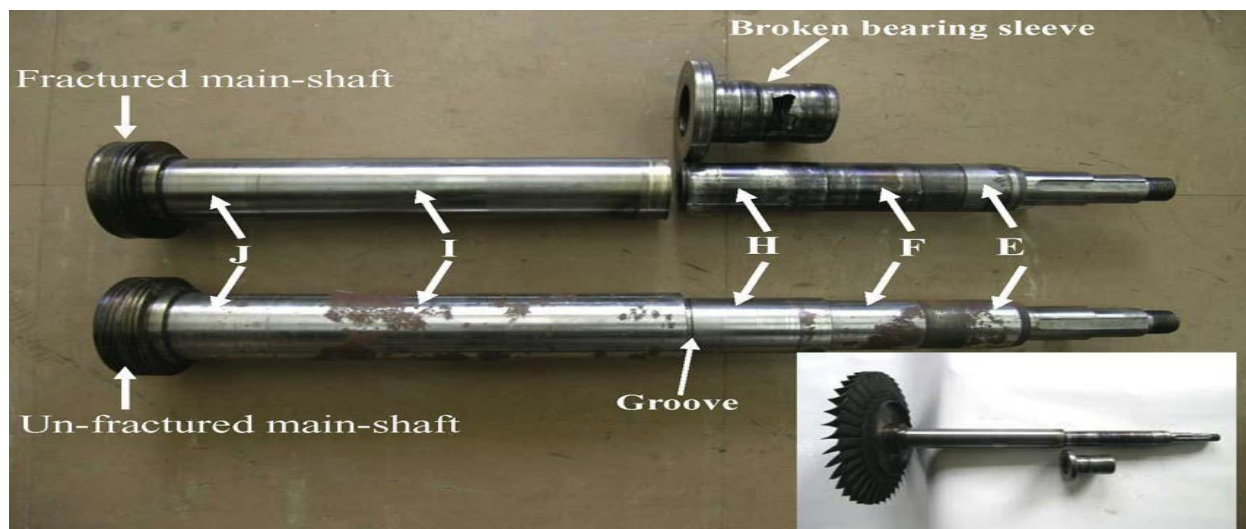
Fractured main-shaft and broke bearing sleeve. [3]
